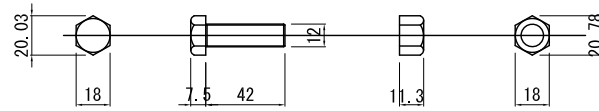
DETAIL OF MECHANICALLY STABILISED EARTH WALL(2)
